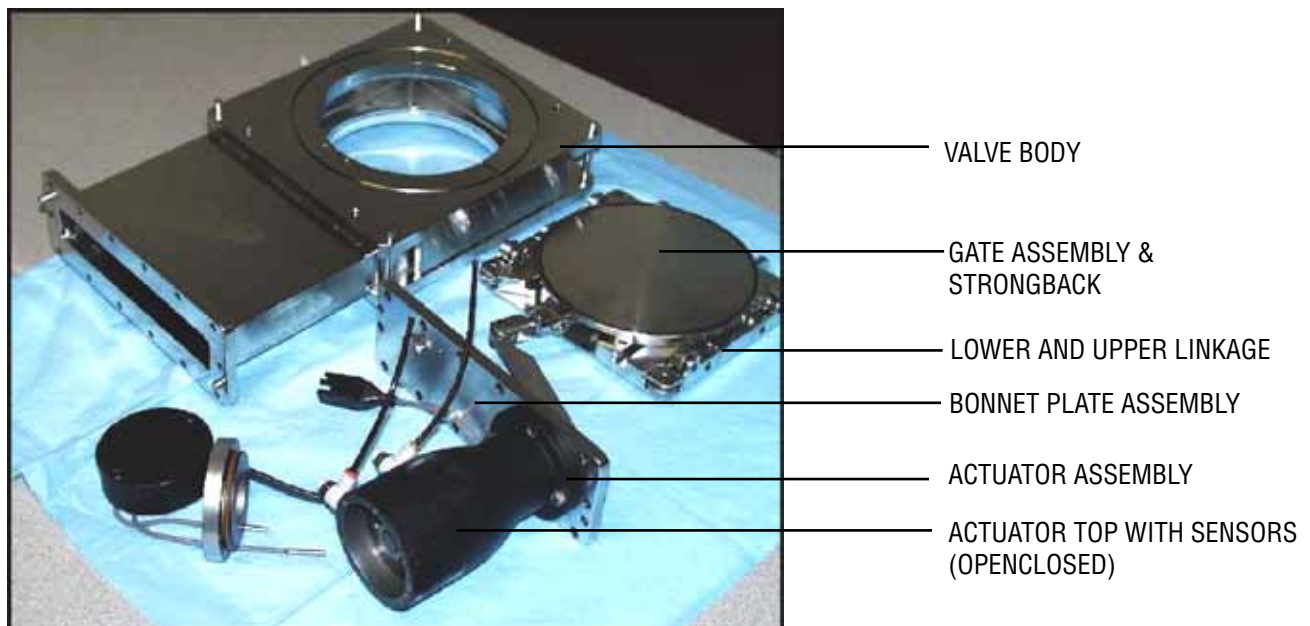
BONNET ACTUATOR CARRIAGE ASSEMBLY SEPARATED FROM VALVE BODY
